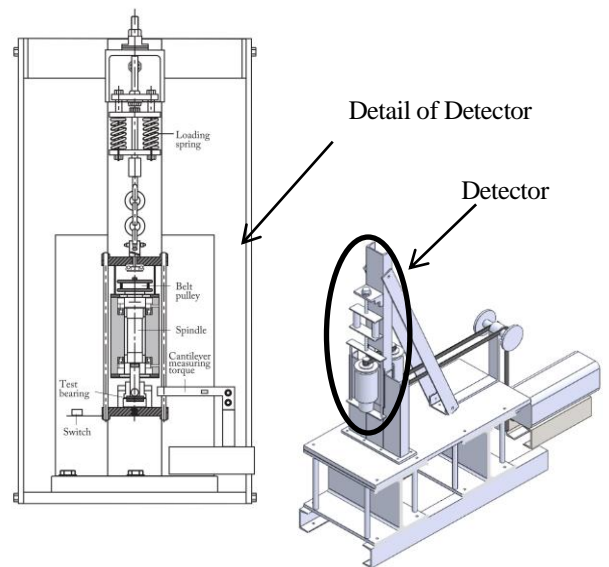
Detector for Evaluating Fatigue Life of Thrust Ball Bearing
